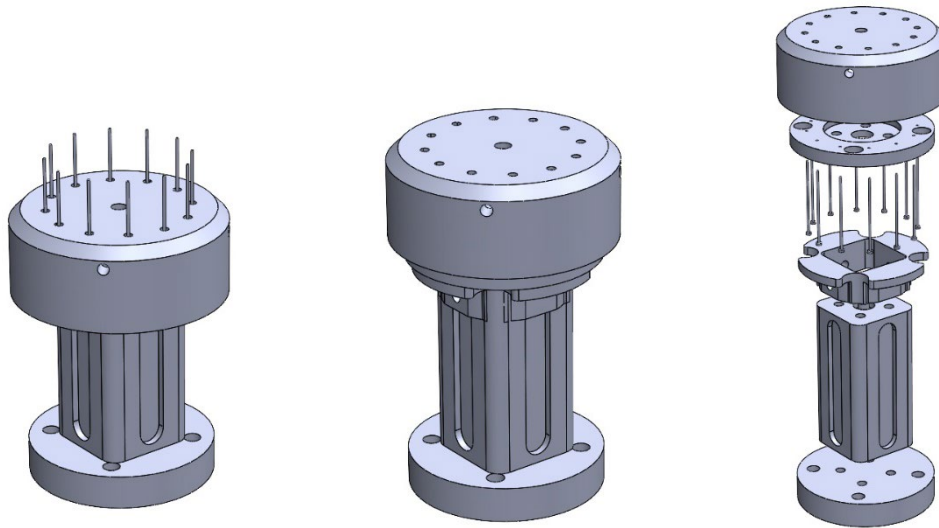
CAD model of the needle-gripper in its retracted state (left), its extended state (middle) and exploded view (right)
